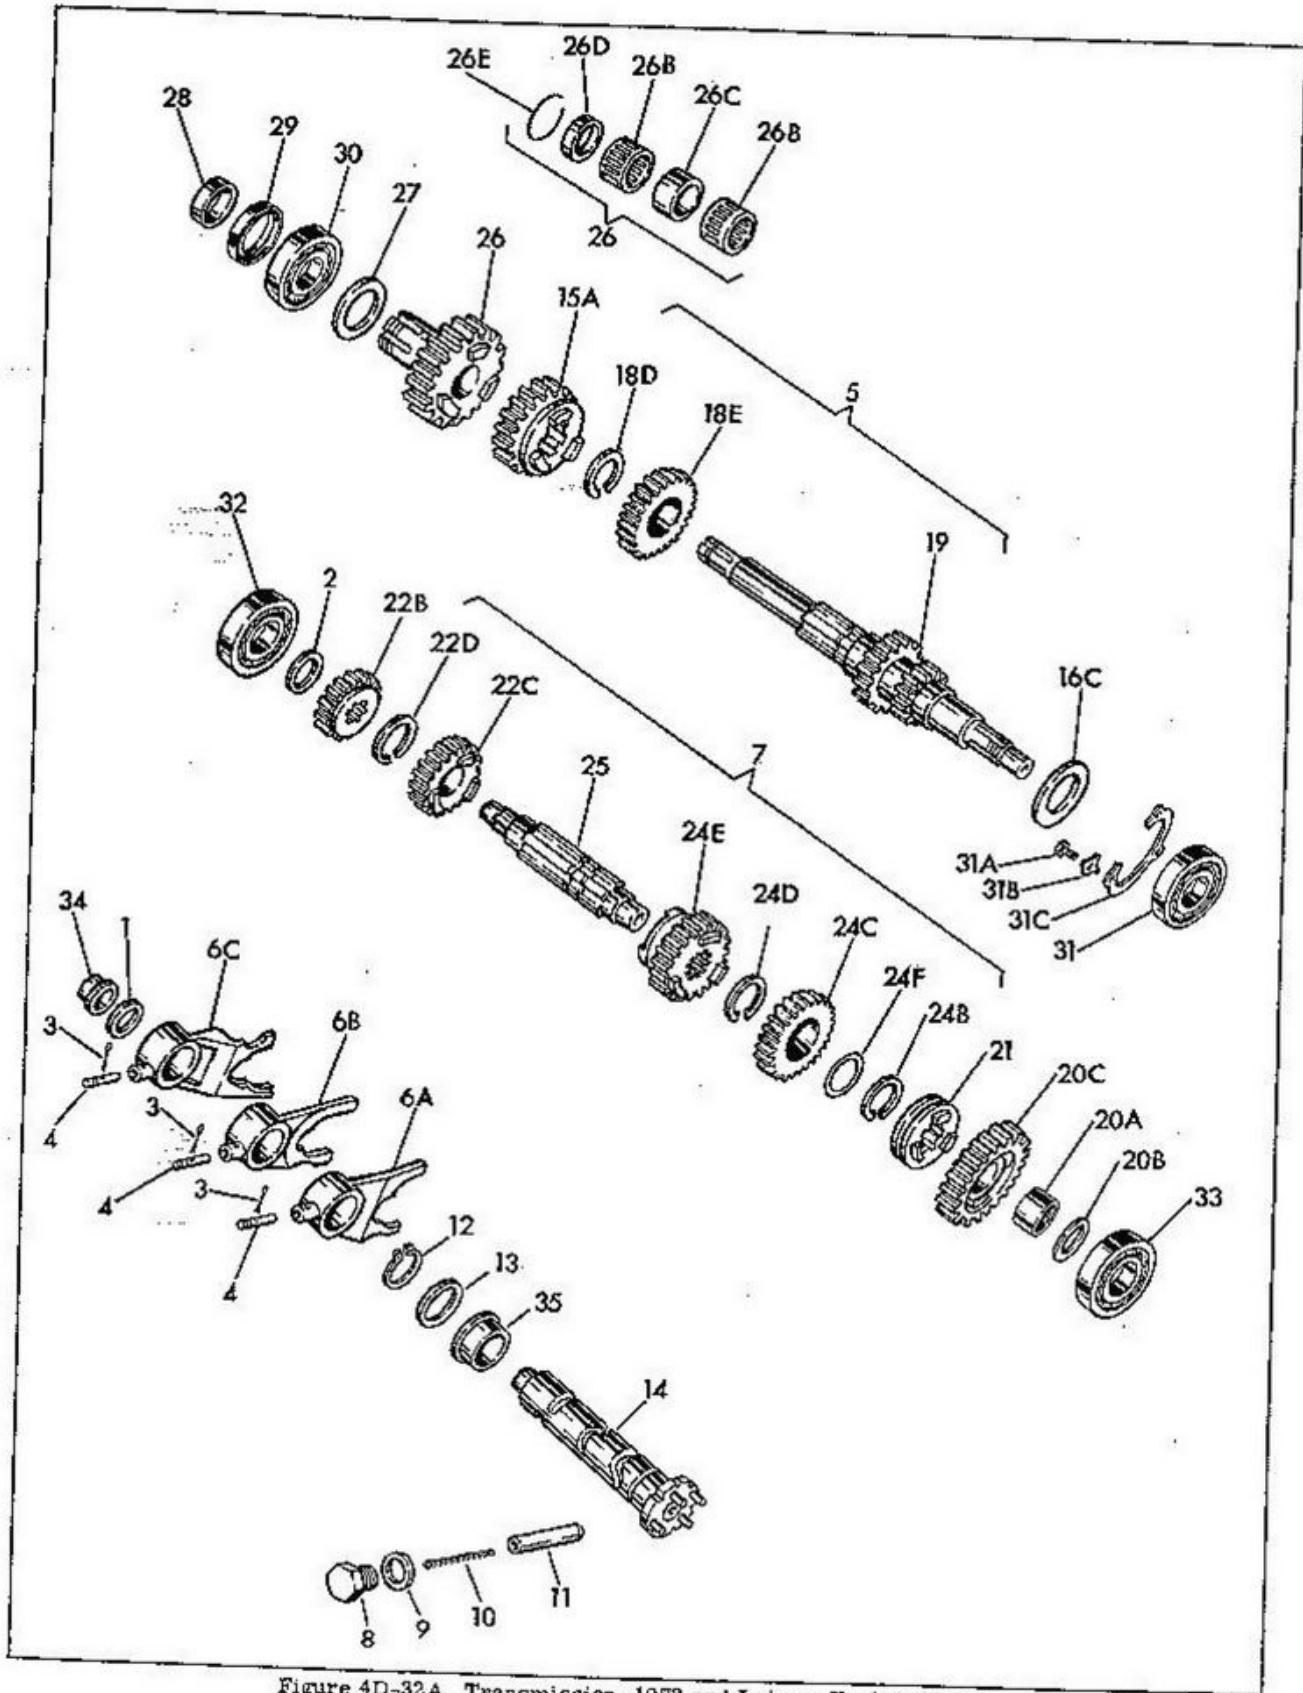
D-32A. Transmission, 1973 and Later - Exploded View
